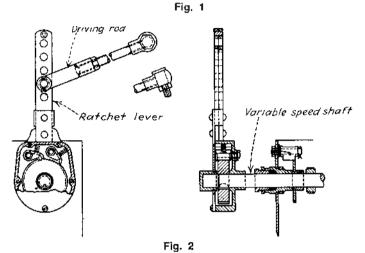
This variable-speed drive is suitable only for very light duty in a laboratory or for experimental work. The drive rod receives motion from the drive shaft and it rocks the lever. A friction clutch is formed in a lathe by winding wire around a drill rod whose diameter is slightly larger than the diameter of the driven shaft. The speed ratio can be changed when the drive is stationary by varying the length of the rods or the throw of the eccentric.
